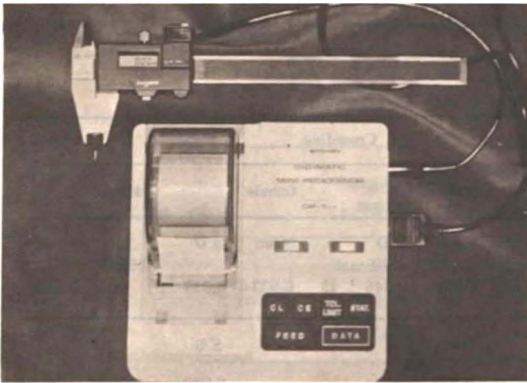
Sliding Caliper and Mini-processor. (Mitutoyo Co., Japan)
